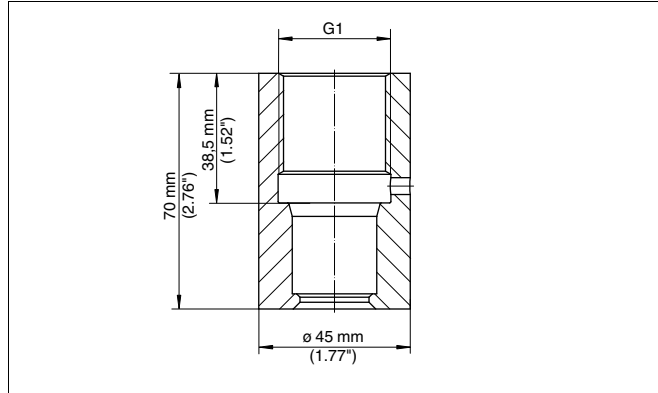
Dimensions welded socket G1" suitable for PASVE
